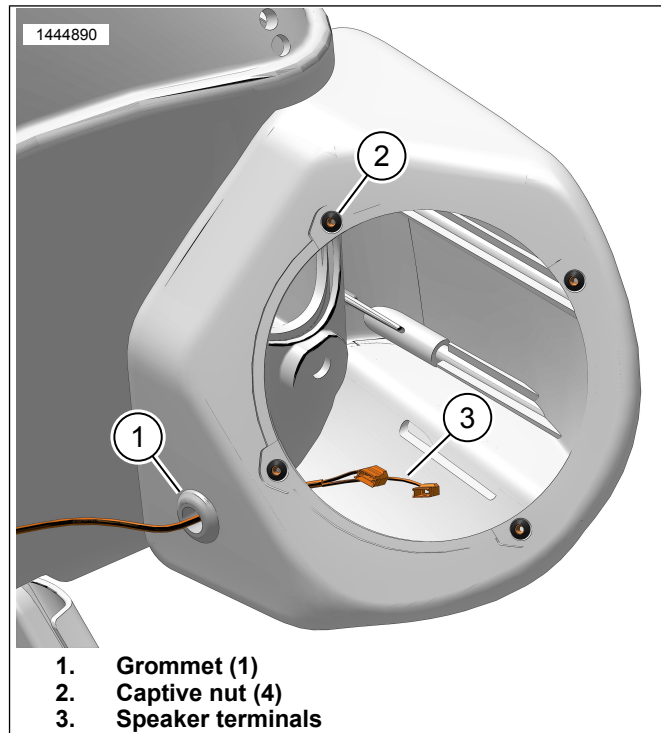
Speaker Pod Wire Harness (Left Side Shown)
